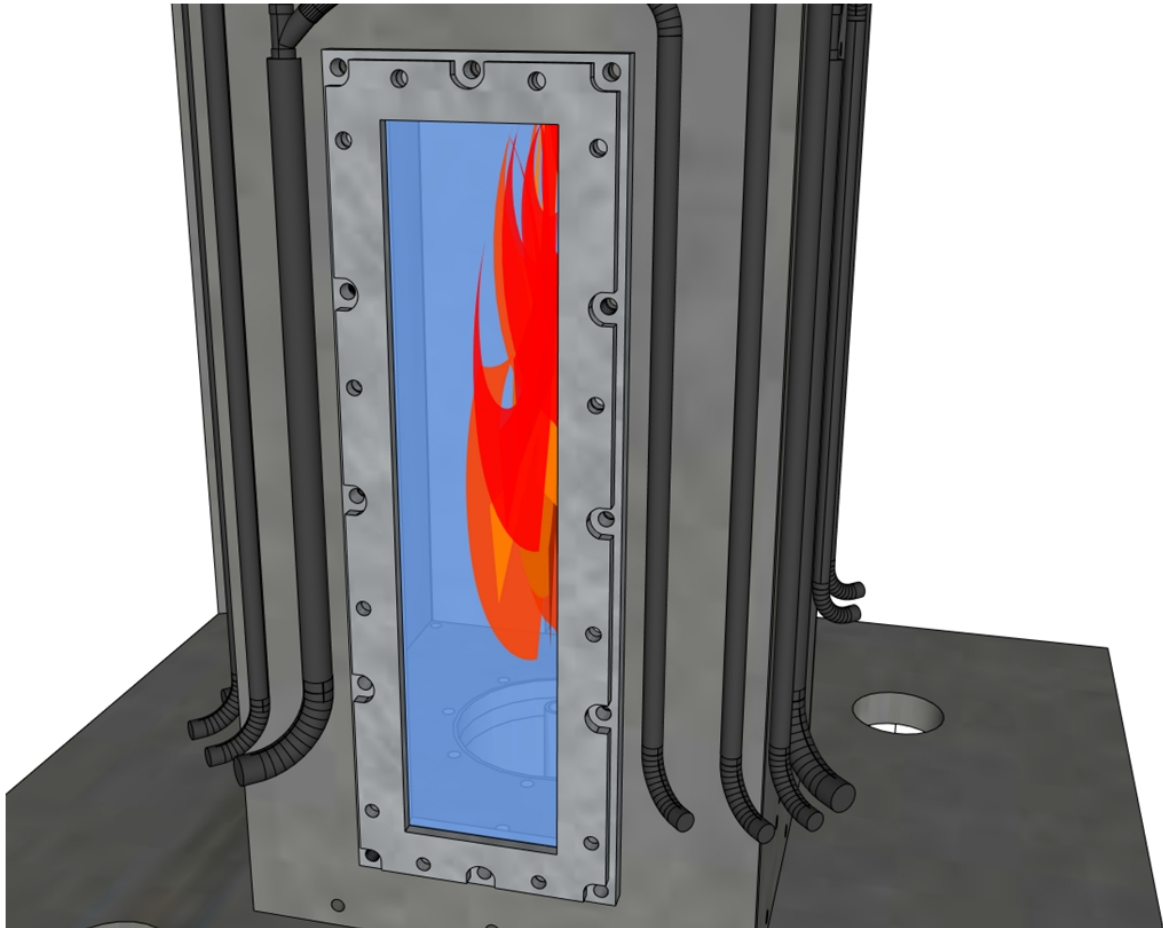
CAD drawing of the window frames set on the combustion chamber.
